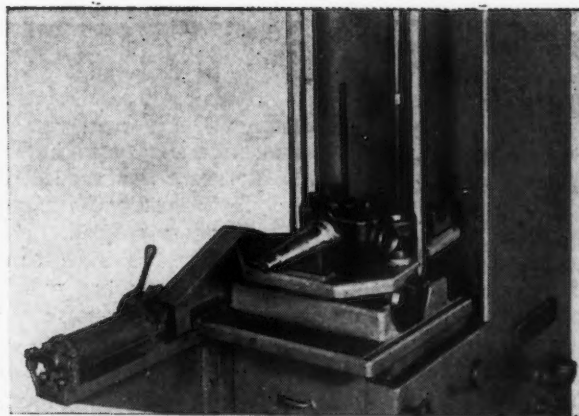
Broaching the keyway in one bore of a steering knuckle with the fixture in the down position.
